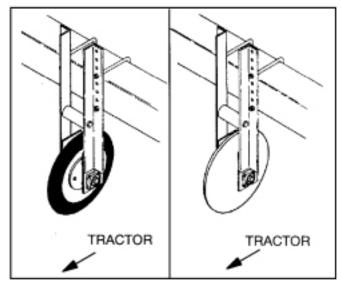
Semi-Pneumatic Wheels (left) & Steel Guide Wheels (right)
